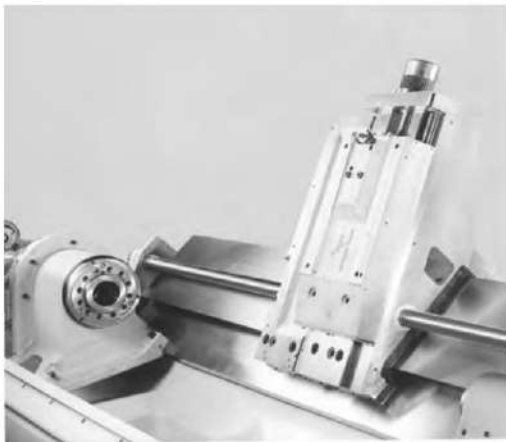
The slant bed of a CNC turning centre (Courtesy, Boehringer werkzeugmaschinen GmbH, Germany)
